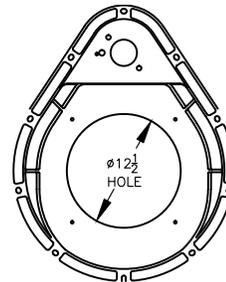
Burner Mounting Plate and Burner Adapter Plate
